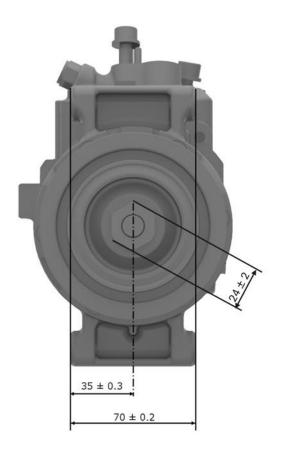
Dimensions of refrigerant compressor, front view (example DENSO-7SEU17)
